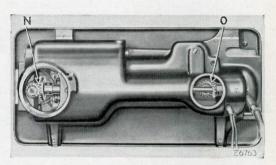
Base View, Showing Bevel Gears in Bed of Machine
